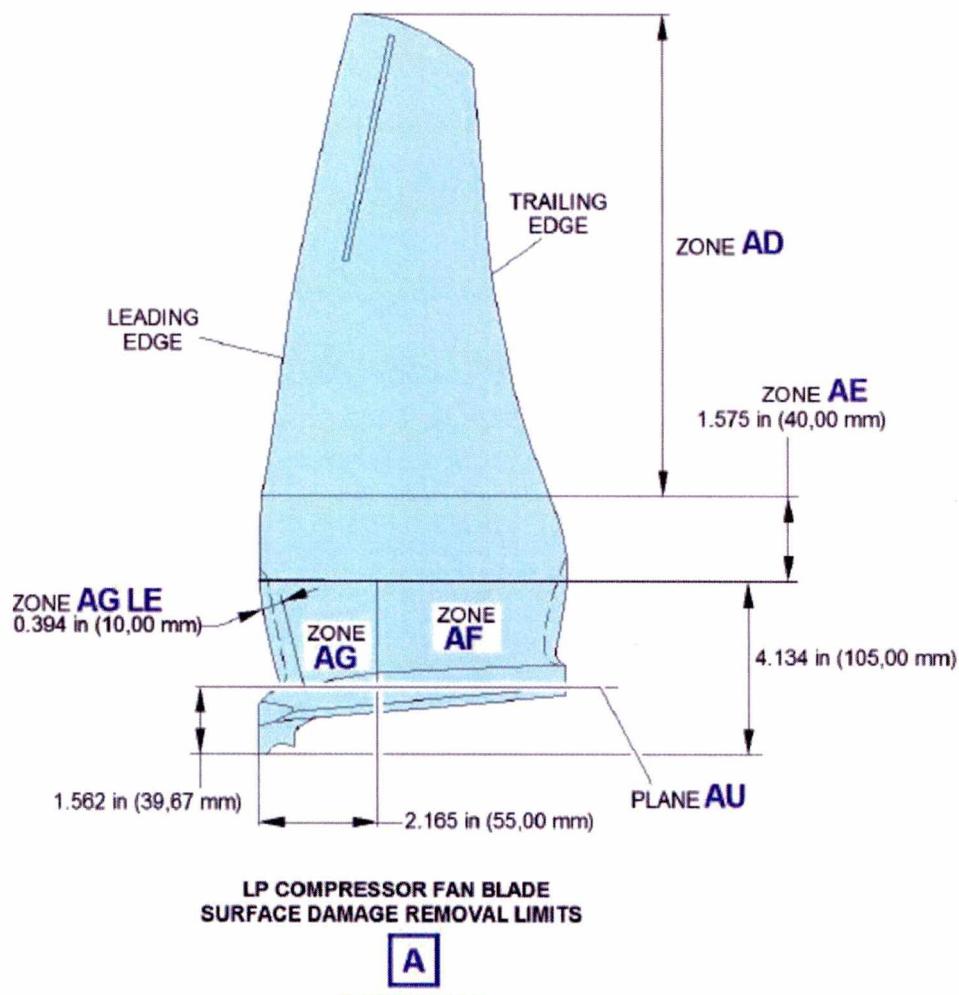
, Sheet 1: LP compressor fan blade assembly – Repair details and dimensions (Sheet 1 of 89)
